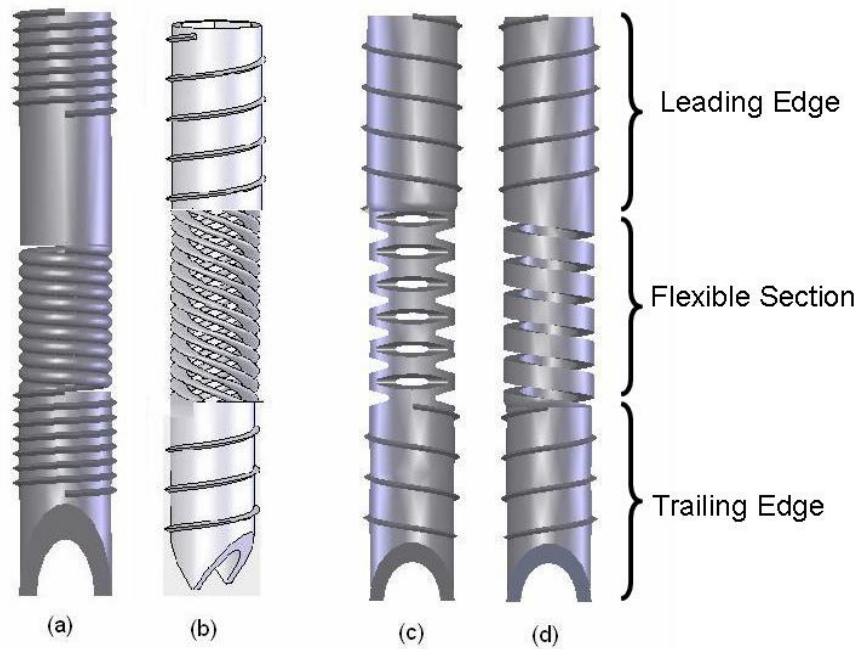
Different ways of creating a flexible screw (a) using spring, (b) using hollow cables, (c) by cutting notches, (d) by cutting a helical coil
